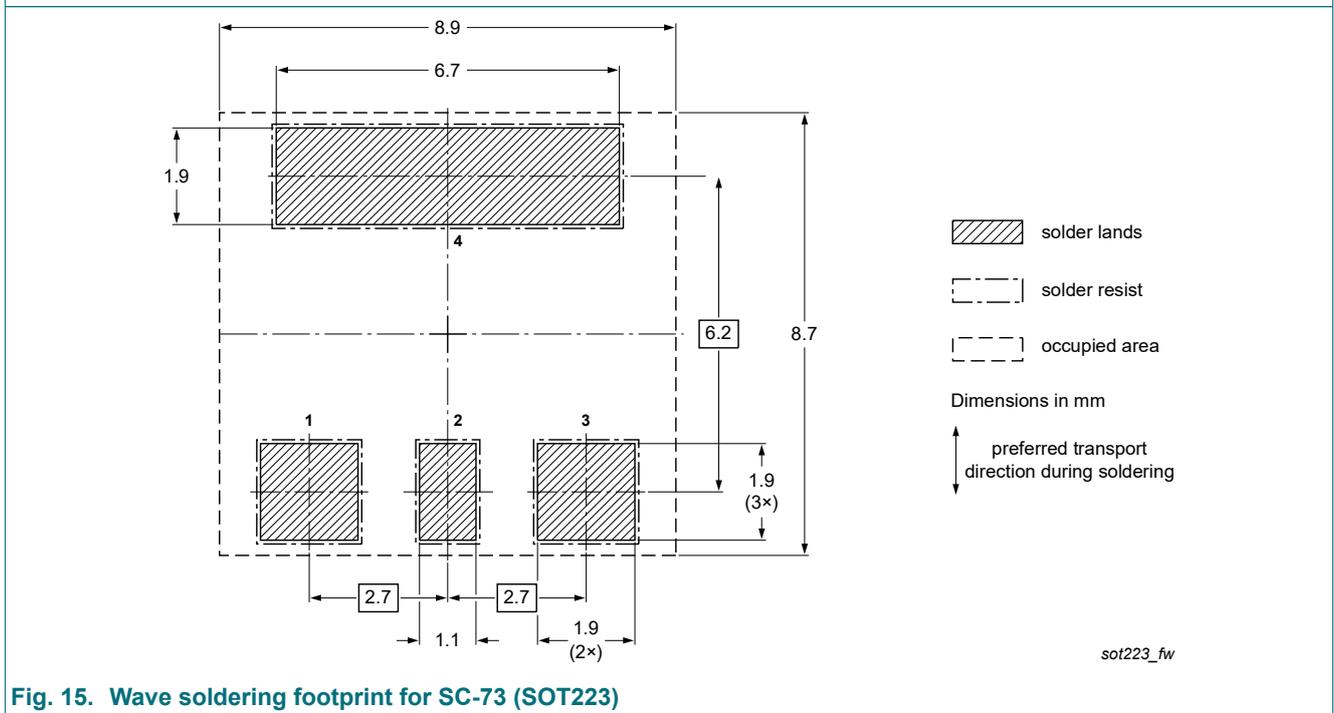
Wave soldering footprint for SC-73 (SOT223)
